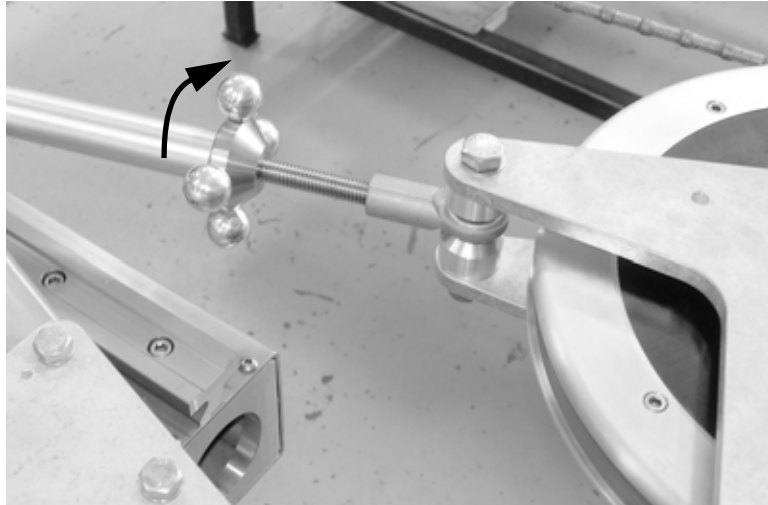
Turn the tension knob on the drive wheel fixture to increase the tension on the wire. (Depending on the exact length of the wire, about 3-4" of the screw will be visible when the tension is set correctly.)
